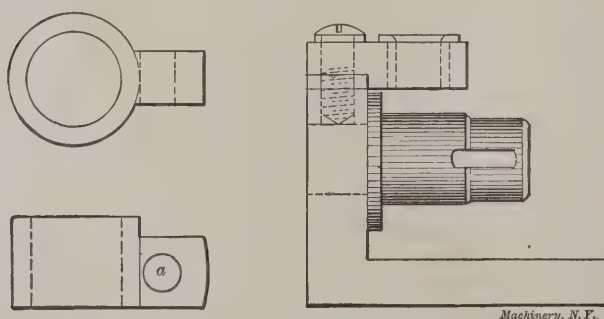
Piece to be Drilled and Jig Used for this Work.
